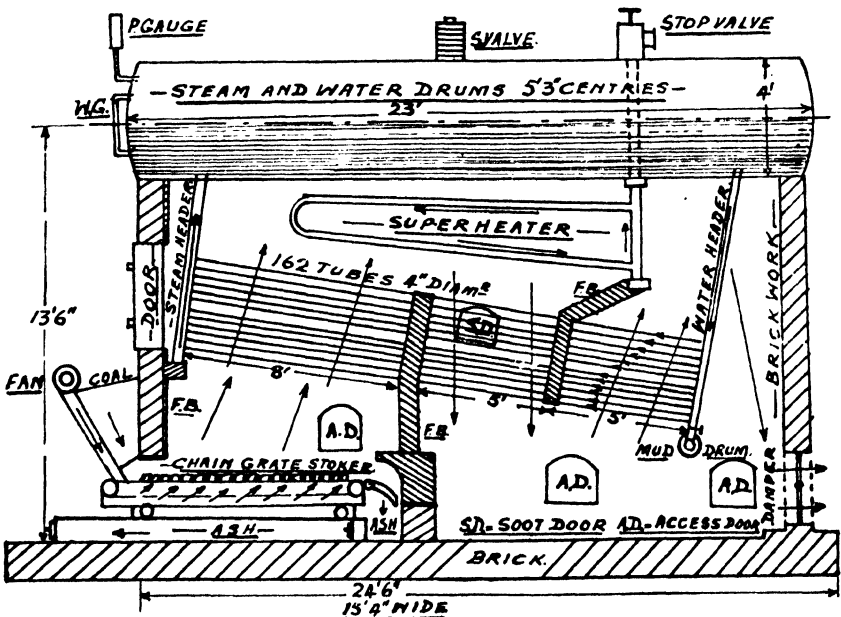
Sectional Side Elevation of Babcock & Wilcox Water-Tube Boiler.
